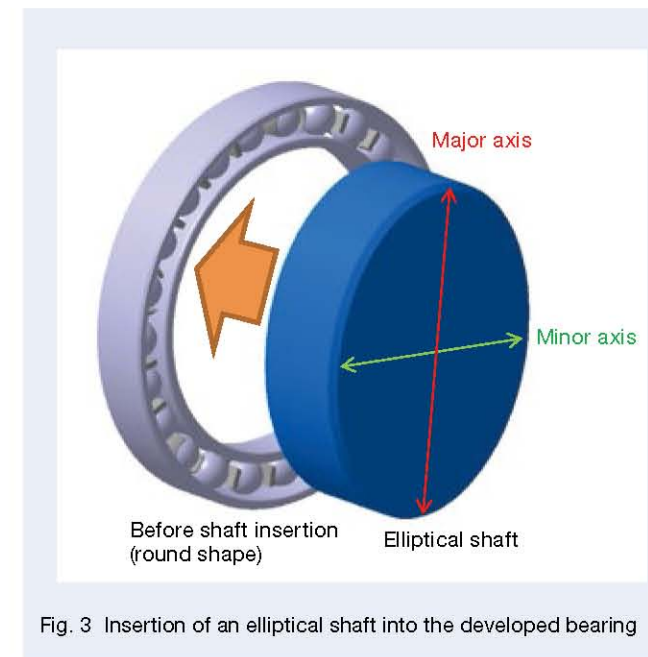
Insertion of an elliptical shaft into the developed bearing
